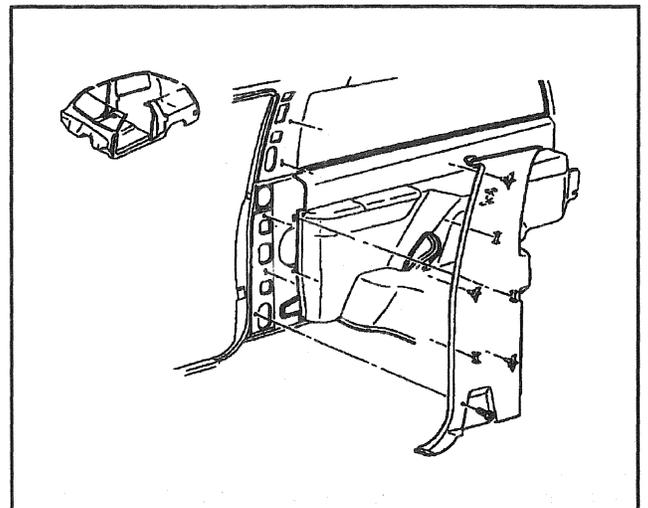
Front Side Door Lock Pillar Garnish (Two-Door Utility)
